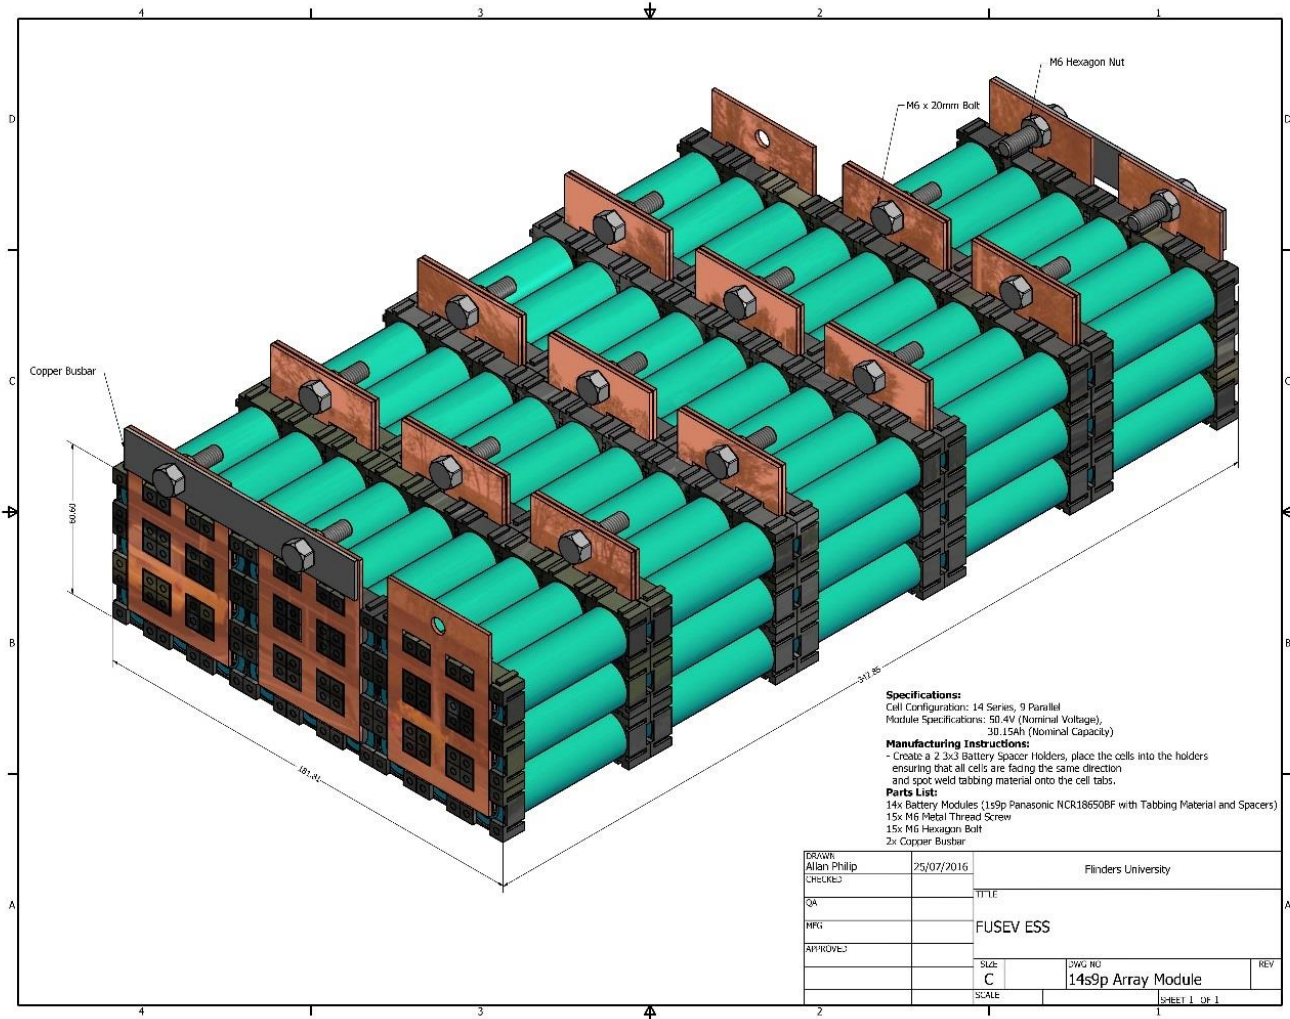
The mechanical drawing of the FUSEV's 14s9p BARR.
